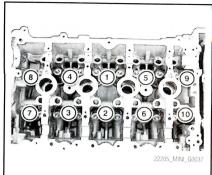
Cylinder head bolts (illustration shows camshafts removed)
